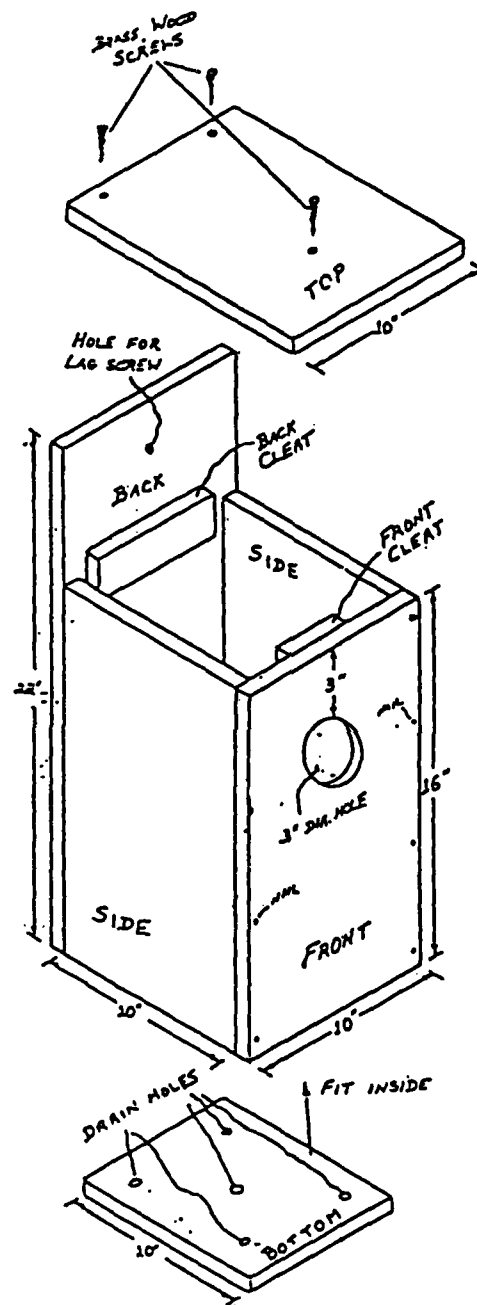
PLANS FOR A KESTREL NEST BOX
